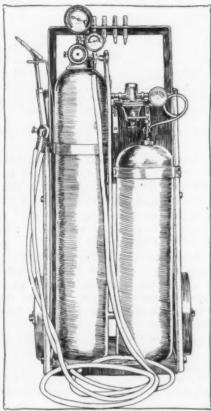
PREST-O-WELDER OUTFIT
